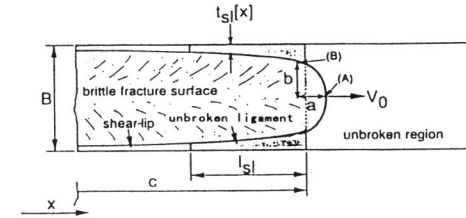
Fracture surface of a propagating crack, schematic
